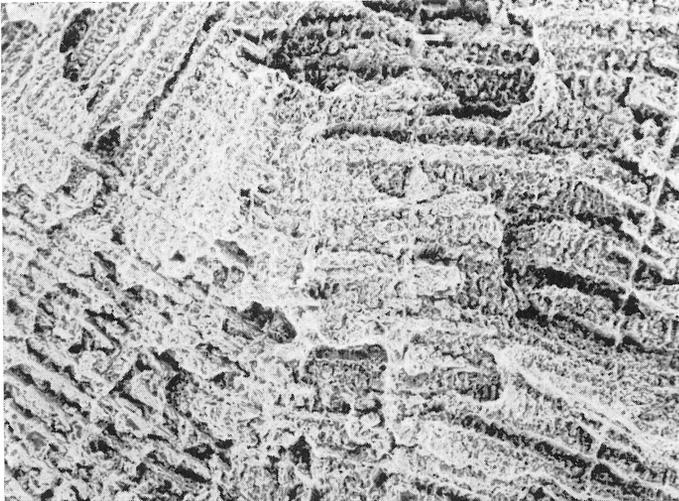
SEM micrograph of a clasp assembly fracture surface.
